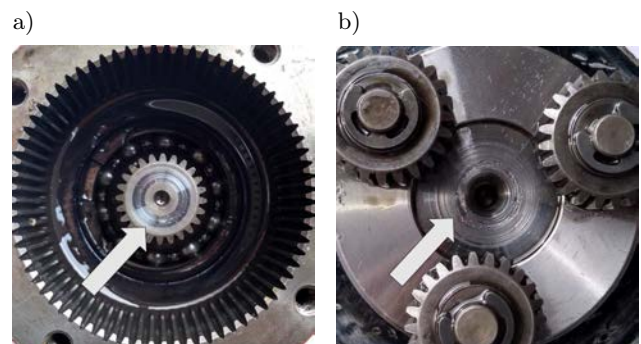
Damages resulting from operation of incorrectly installed bearing in the gear output shaft: a) scratches on sun wheel of the planetary gear, b) scratches on carrier of the planetary gear.
